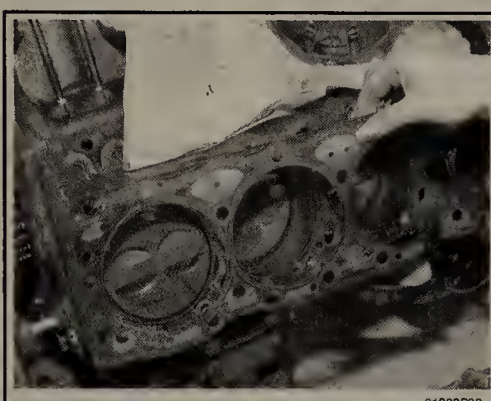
Remove and discard the cylinder head gasket, then thoroughly clean the gasket mating surfaces
